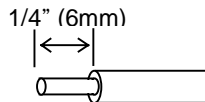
Wire Terminal on Option Connection Terminal Side.
